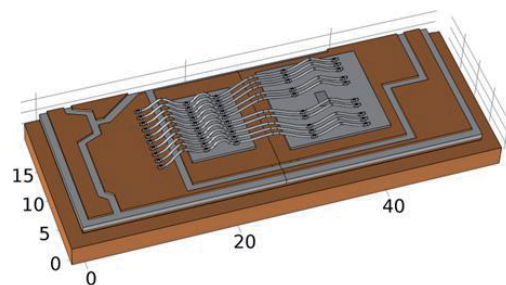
CAD figure showing one section of a module. The section consists of one IGBT chip, one diode chip and 10 bond wires.
